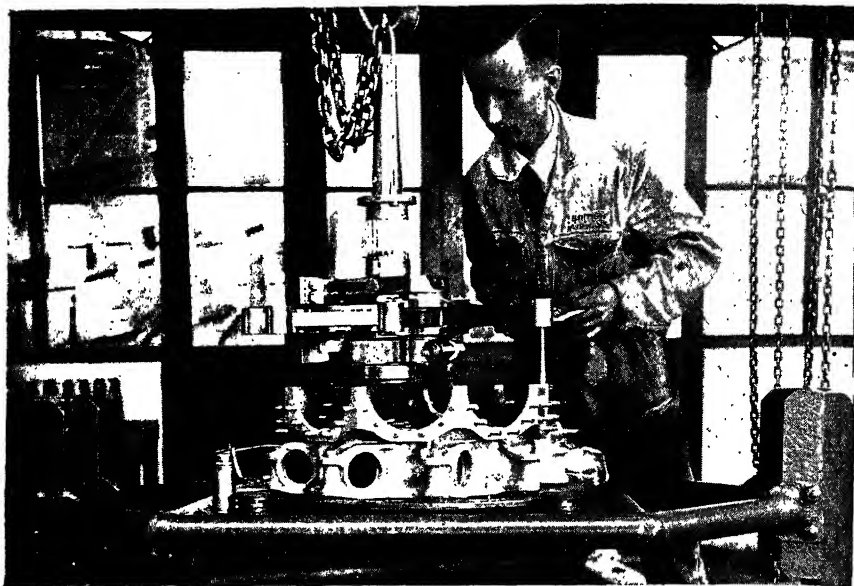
ASSEMBLING CRANKSHAFT AND MASTER ROD ASSEMBLY TO CRANKCASE
